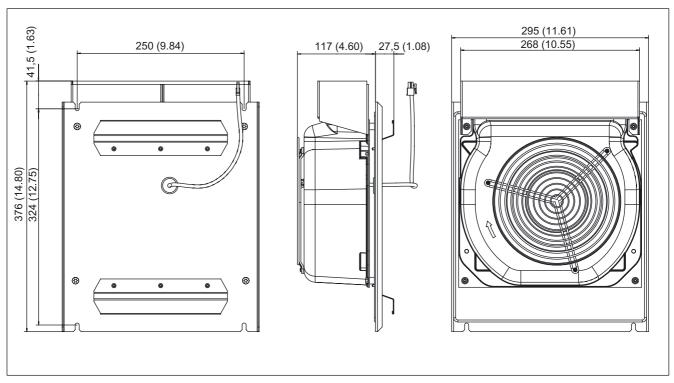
Dimension drawing of fan for Motor Modules with external air cooling (132 A and 200 A)
